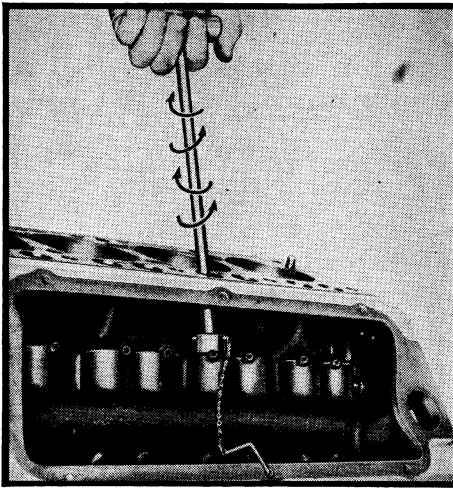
Removing stuck hydraulic lifter with special tool. V8 engines
